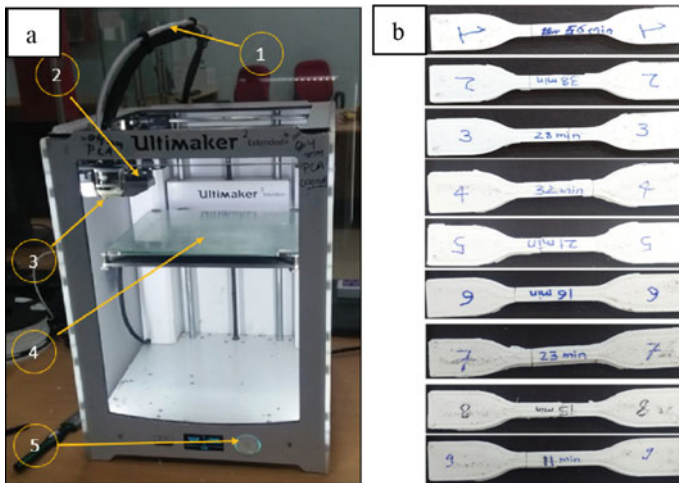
a Ultimaker² 3D printer used in study 1: PLA wire; 2: heater; 3: nozzle; 4: build platform; 5: control panel, and b fabricated specimens
